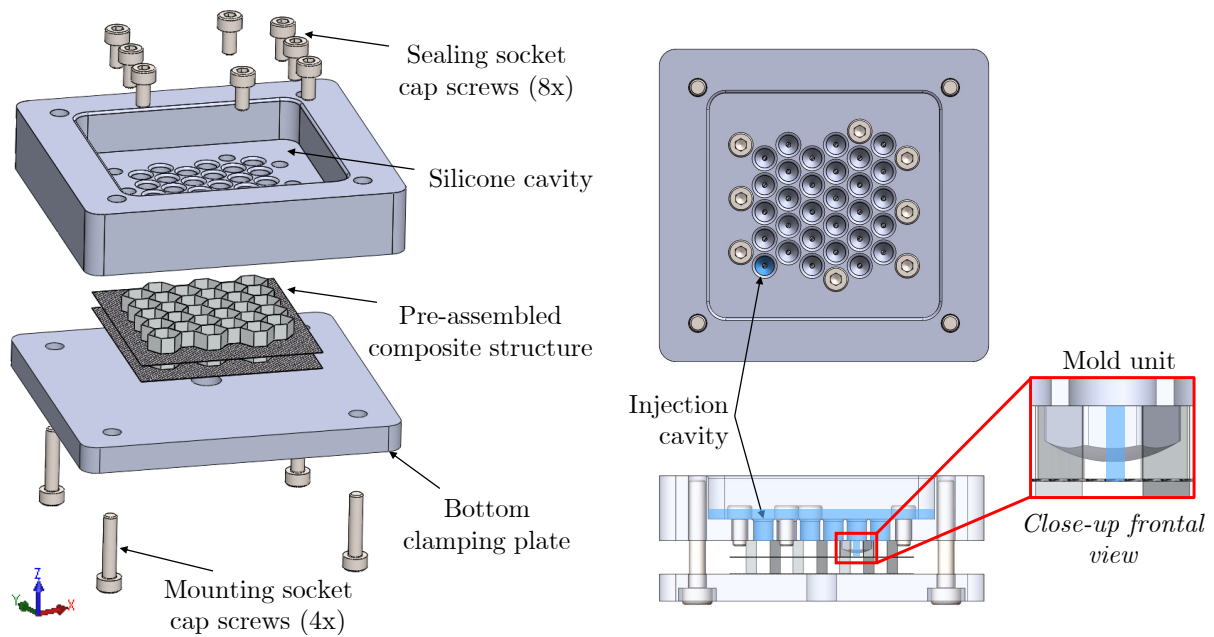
Laminated mono-module assembled in the mold, showing : a exploded view of each element used (left), the topside displaying the silicone injection channels (right above), and a close-up view of a silicone injected mold unit.
